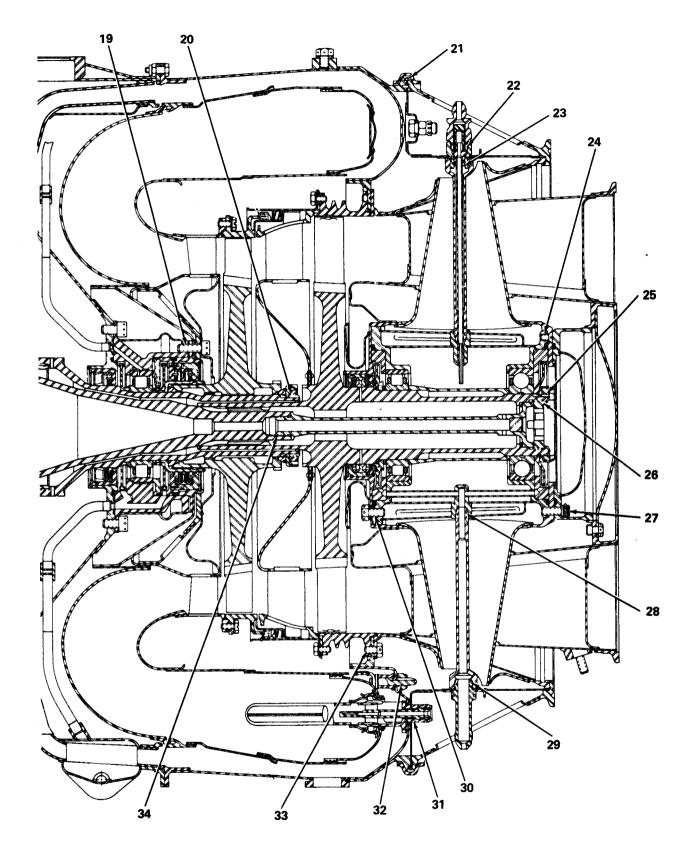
Special Torque Value Locations (T53-L-11 Series Engines) (Sheet 4 of 6)
